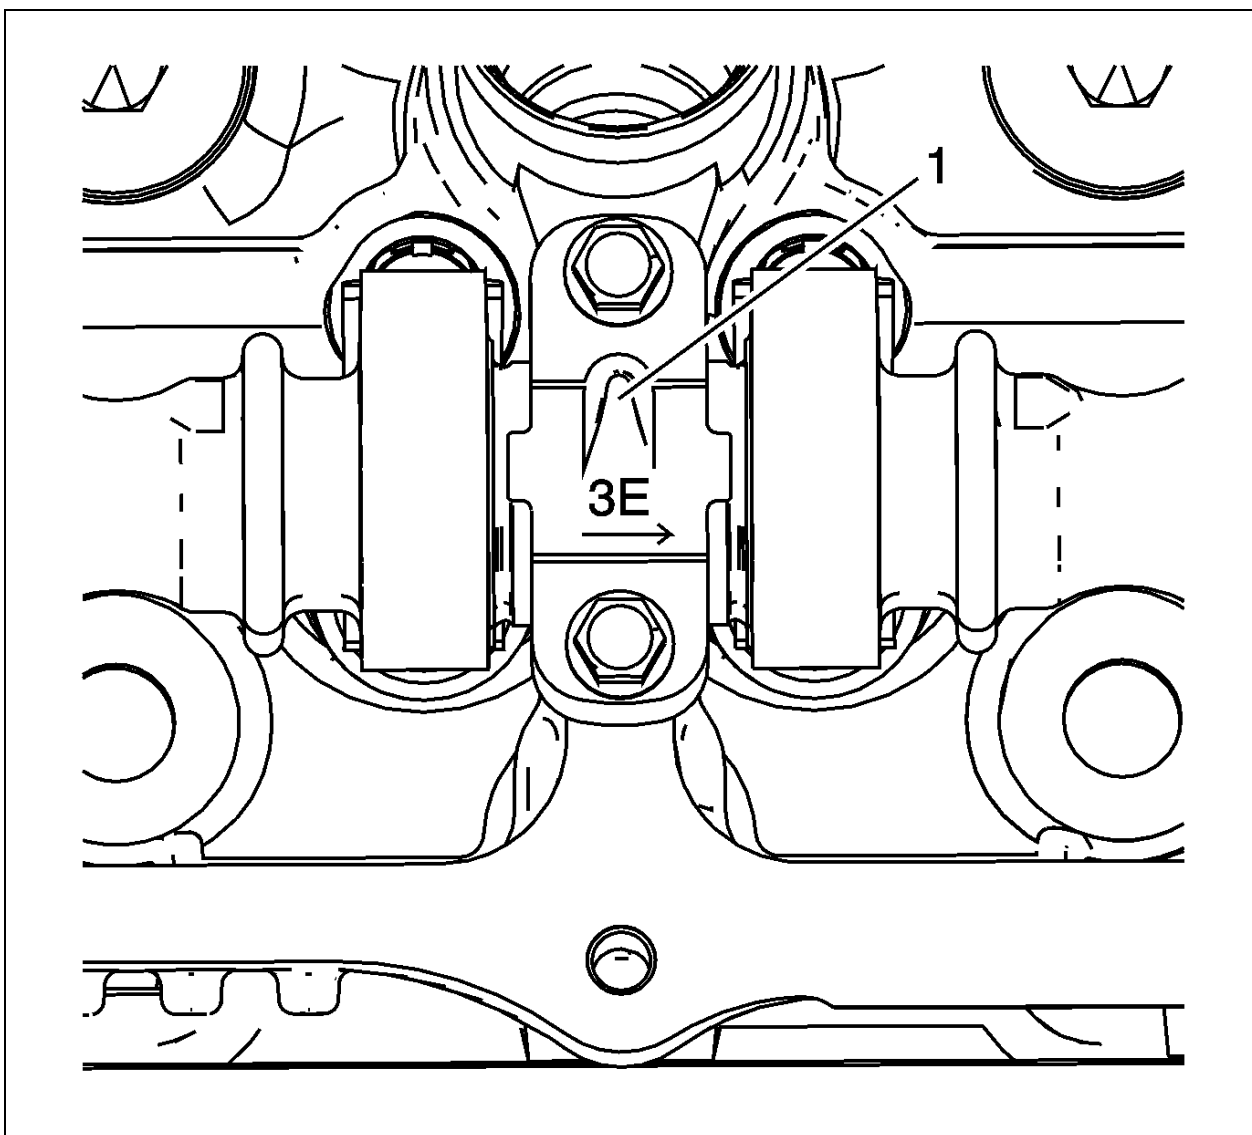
Identifying Camshaft Neutral (Low Tension) Position
